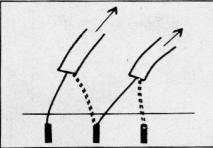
Wiring the shielded cables to the PC board when two lines are used; inputs and outputs are wired in the same way.
